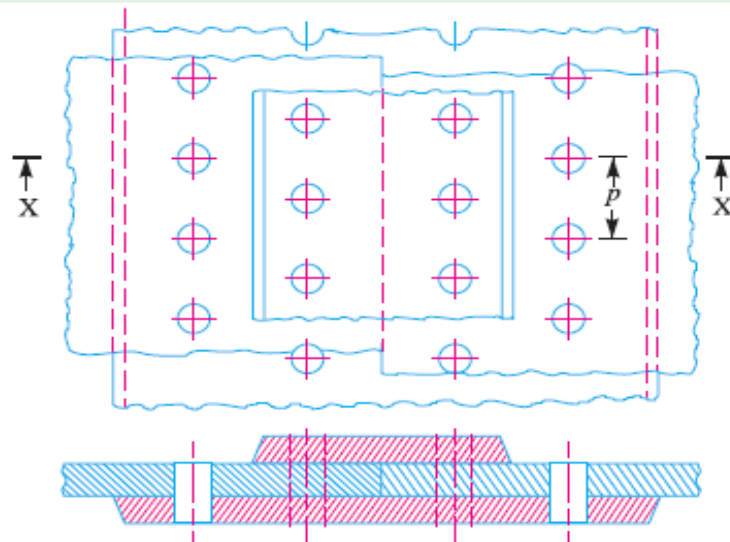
Double riveted double strap (unequal) butt joint with zig-zag riveting.
